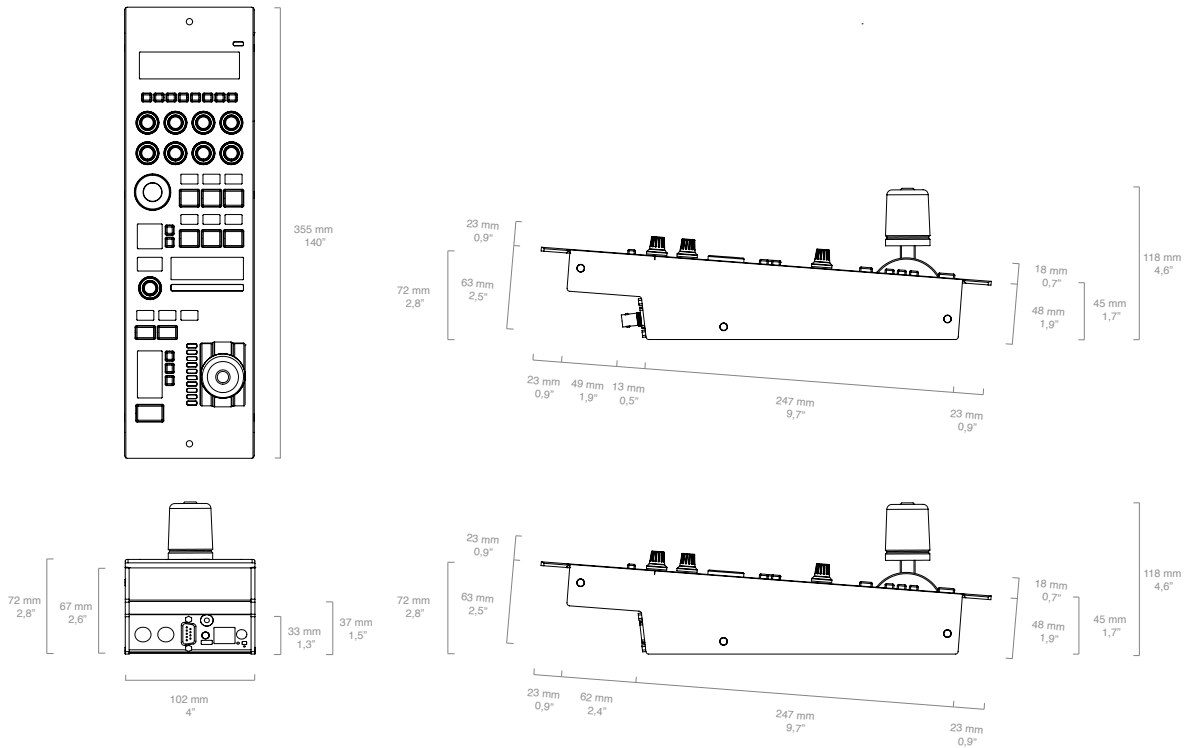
Technical drawing of RCPv2 with key dimensions and layout details.
